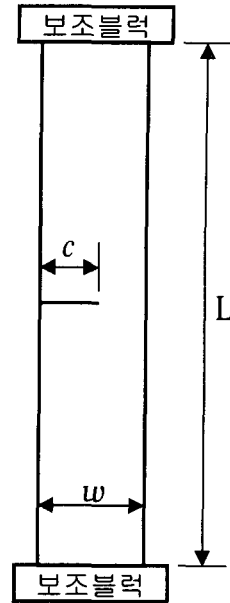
Configuration of fracture test specimens (t(thickness)=1.22mm, w=24.90mm, L=110.65mm)
